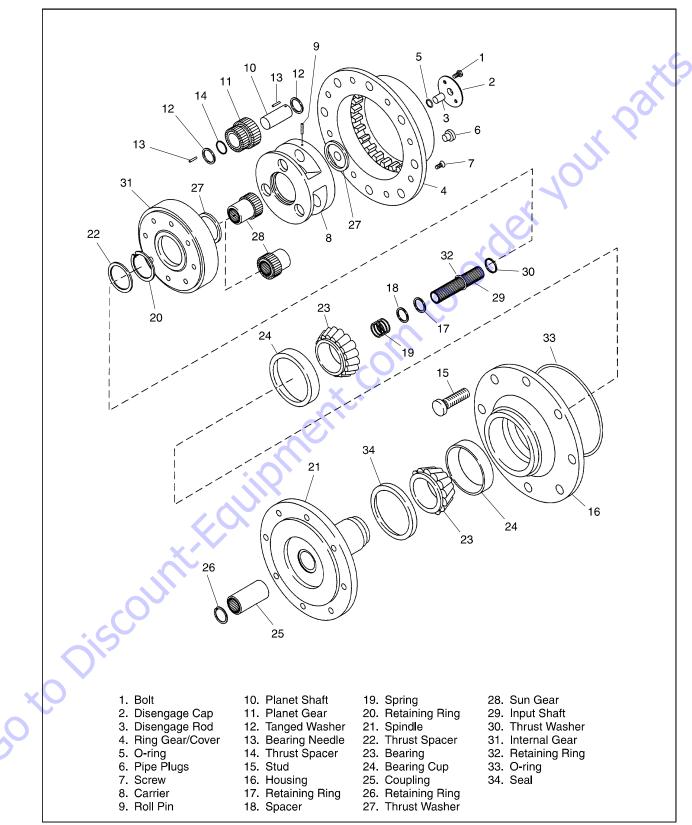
Torque Hub (Prior to S/N 39594) - Exploded View
